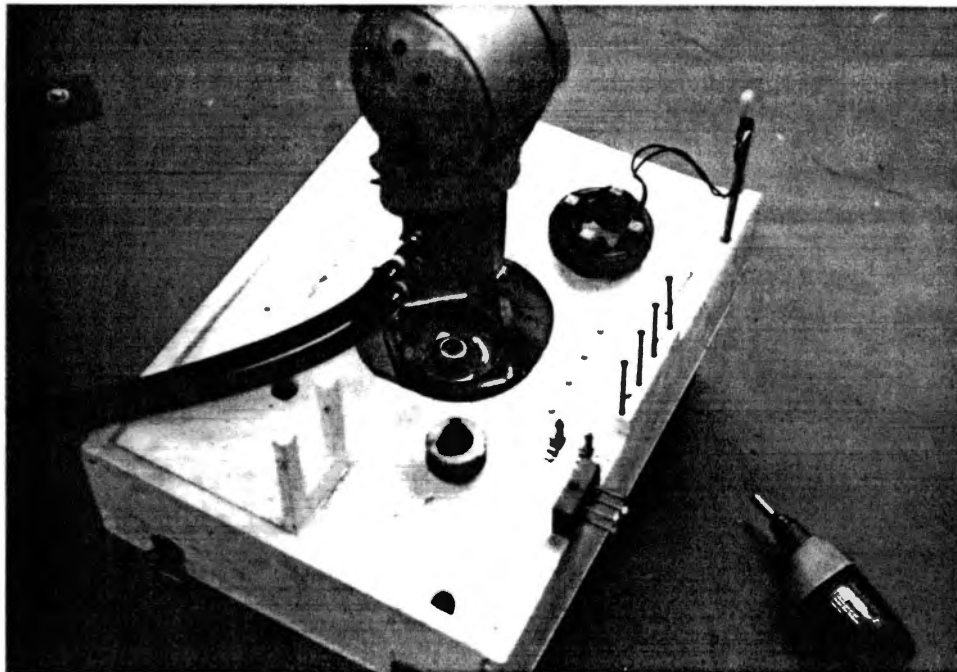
Robot Placing Front Bell onto Locator Block in Fixture
